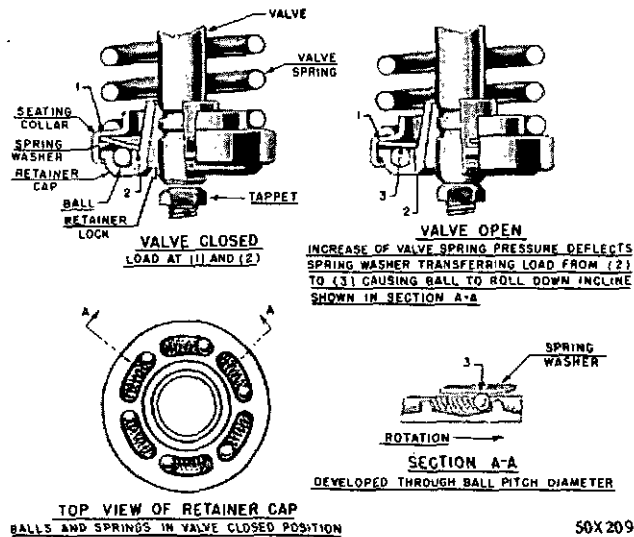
Exhaust Valve Rotators (Cutaway Sectional Views)
